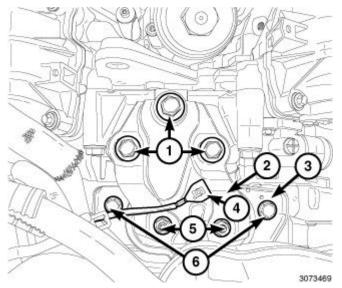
Upper Engine Mount Bracket, Right Engine Mount Isolator, Ground Strap & Fasteners Courtesy of CHRYSLER GROUP, LLC
